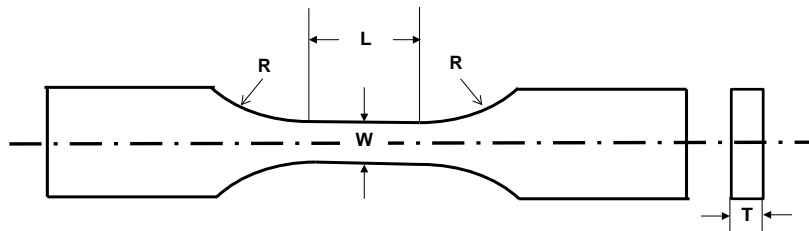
Dimensions of specimen (EH36), thickness = 25 mm.
